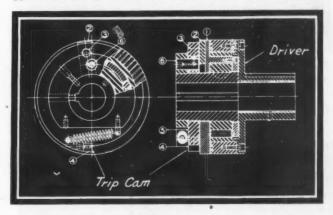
Above—Partial view of shell-marking machine showing single-revolution clutch on main spindle and trip pin with its spring-loaded hand lever-control
